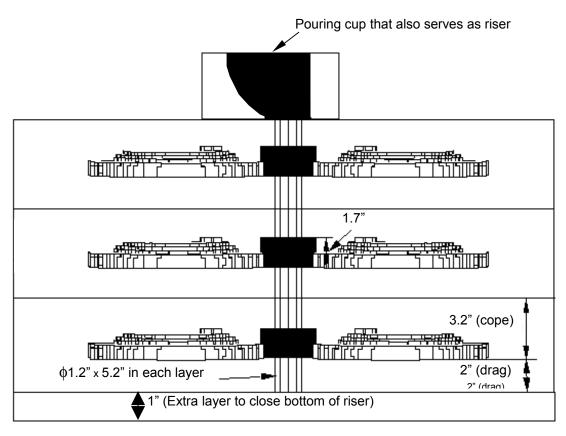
Sketch showing vertical stacking of casting mold boxes for I-pattern assembly.
